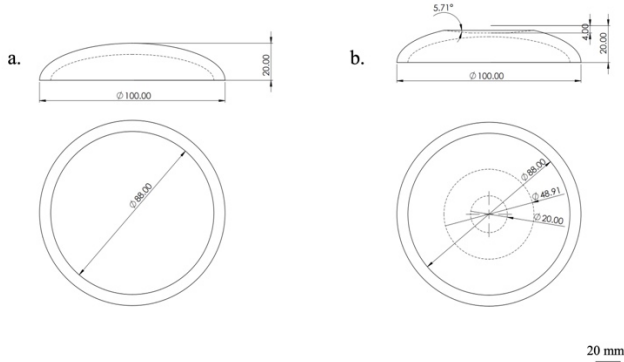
Specimen dimensions of parent structure: (a) before machining; (b) after machining
